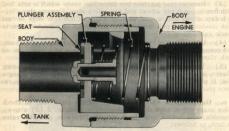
Cross Section of Engine Oil Tank Outlet Check Valve
